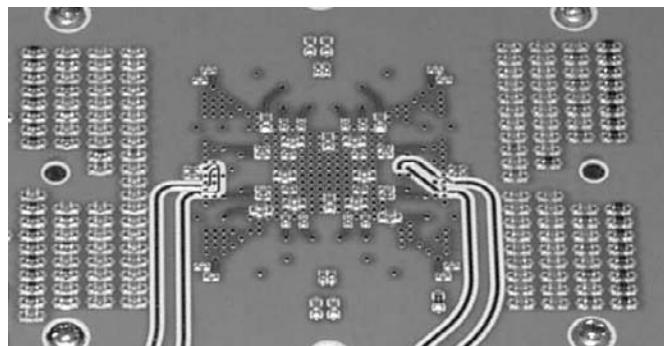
Example of the decoupling capacitors on the bottom of the test fixture below the DUT socket and also surrounding it.
